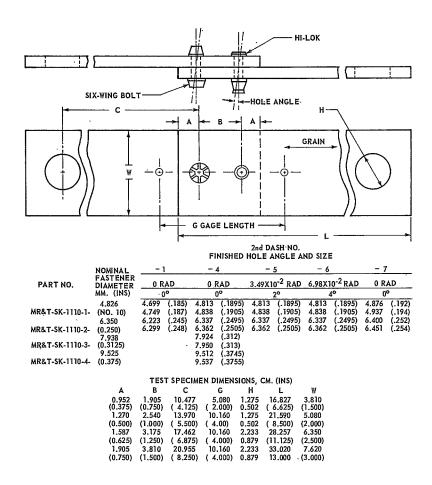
BASIC DIMENSIONS OF TITANIUM 8Al-1Mo-1V SINGLE SHEAR LAP JOINT TEST SPECIMENS USED TO DETERMINE SINGLE SHEAR YIELD AND MAXIMUM STRENGTH FOR TITANIUM 6Al-4V HI-LOKS AND SIX-WING BOLTS
